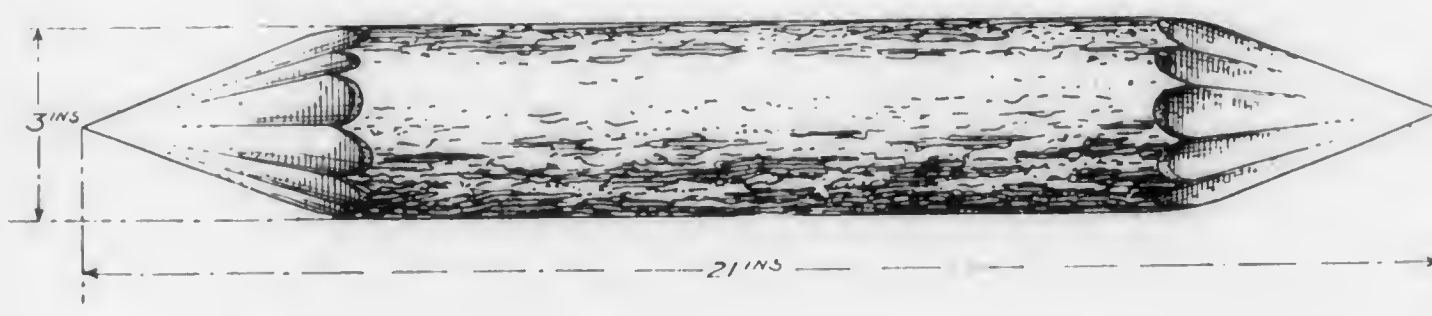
Drawing showing standard dimensions of a mine sprag.
